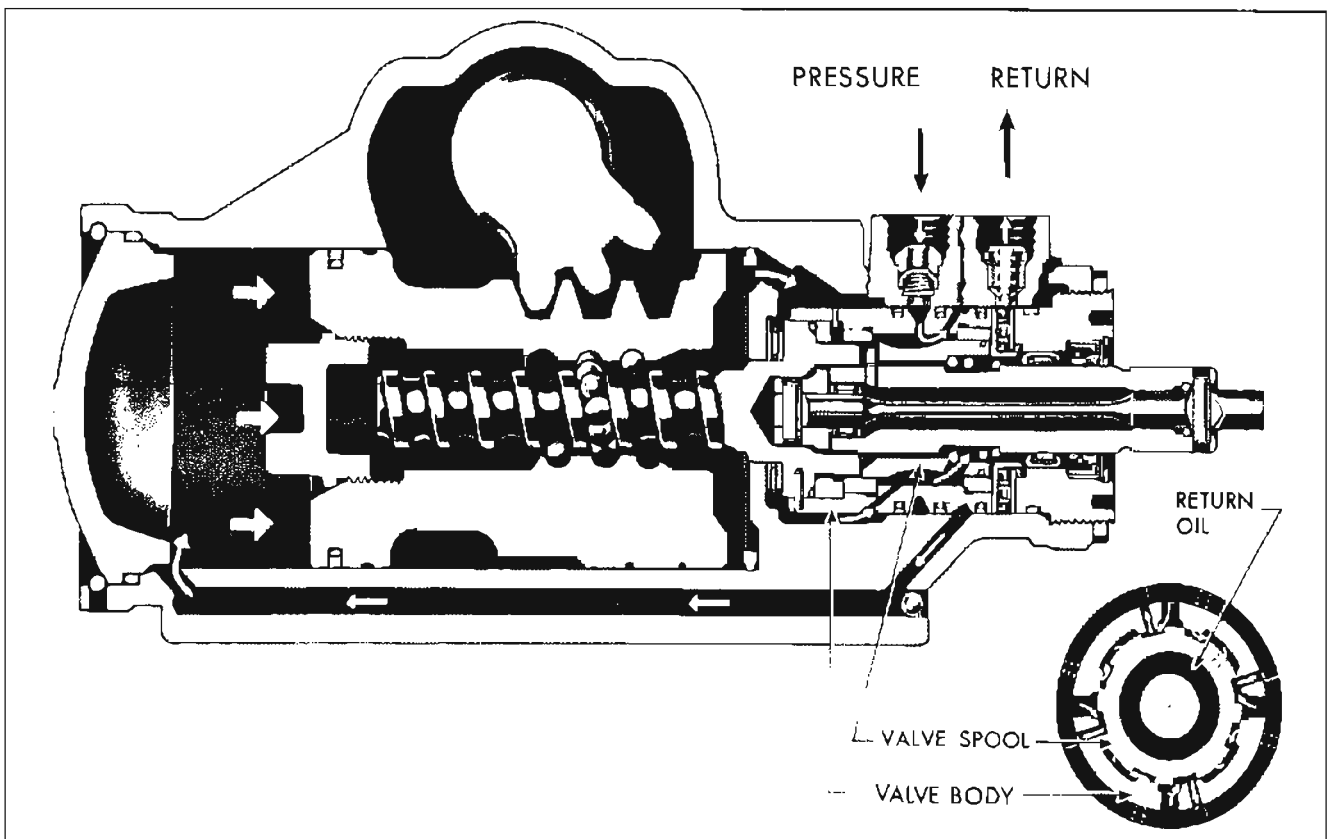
Oil Flow in Power Steering Gear - Right Turn
